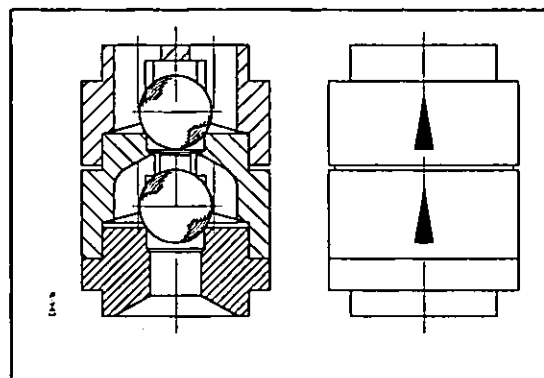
Double Ball Valve - Sectional and Plan View
